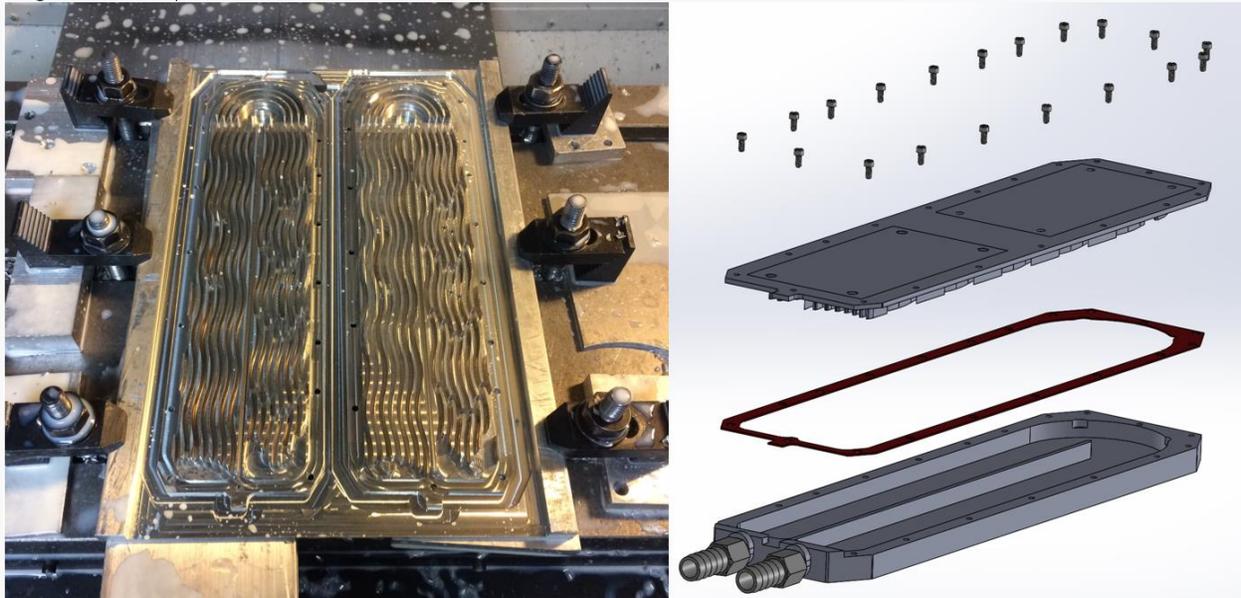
CNC machined fin channels (left) and exploded view of cold plate assembly (right)
